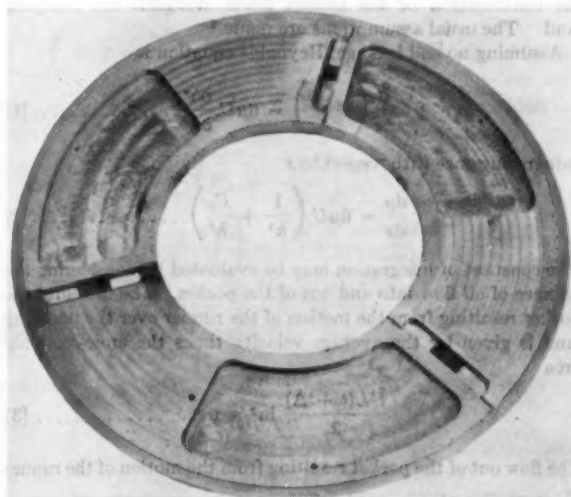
4 1/8-IN. X 8 1/2-IN. HYDRODYNAMIC POCKET THRUST BEARING FOR TEST IN 500-KW TURBINE
